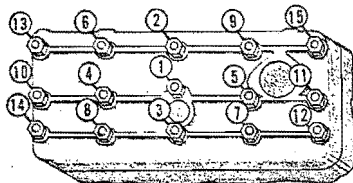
CYLINDER HEAD TIGHTENING SEQUENCE
